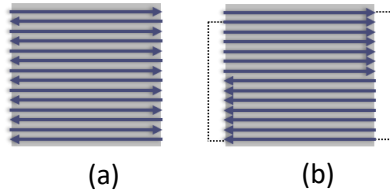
DED AM strategies (a) weld beads deposited side by side in zig-zag with a dwell time of 5 seconds; (b) weld beads deposited from external edge to the centre.
